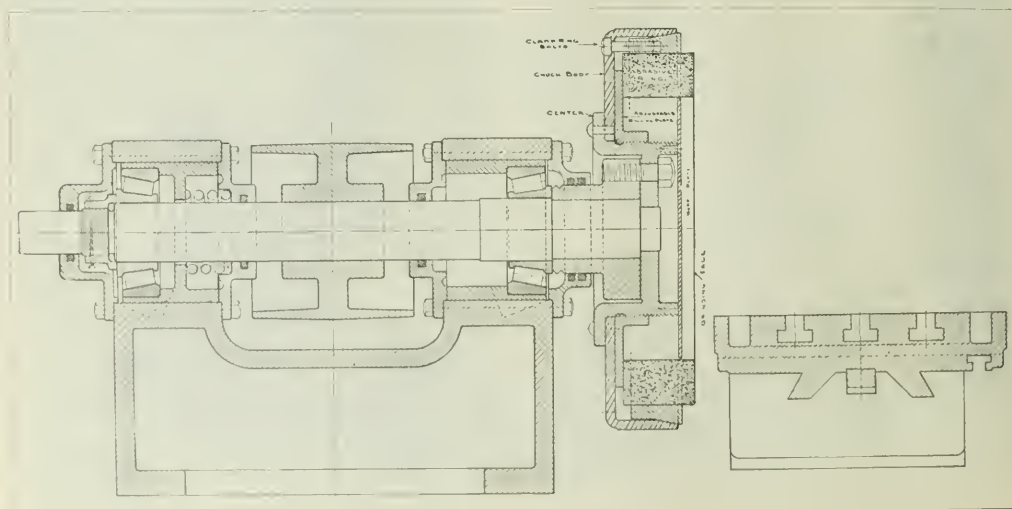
Sectional View through Wheel-head of Ring-wheel Grinding Machine
